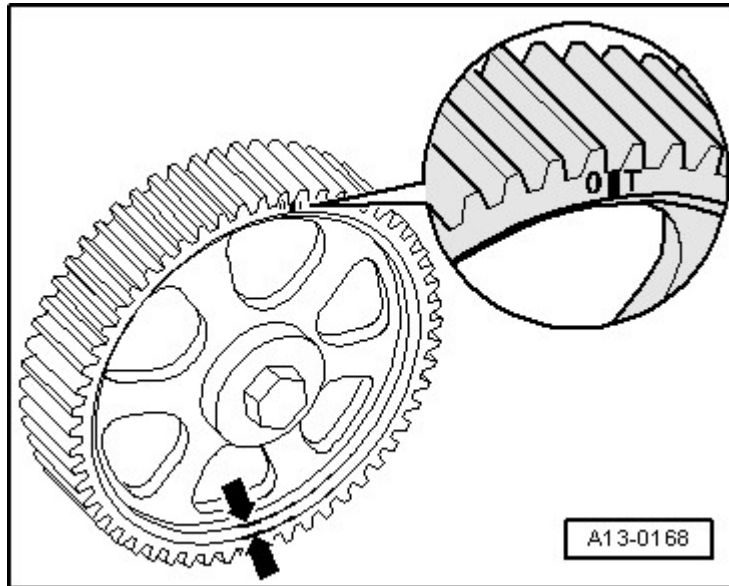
Identifying Camshaft Gear Thin Rib Toward Outside And TDC Marking Visible
